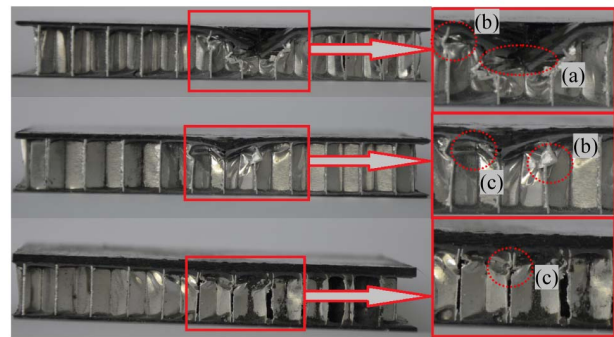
Impacted specimens with carbon fiber face sheet: (a) Face sheet failure; (b) tear of cell wall; (c) cell wall buckling failure.
